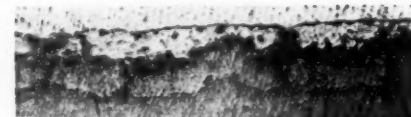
Same sheet as Fig. 11 after right angle bend with $\frac{1}{4}$ in. radius fillet. Cracking, but no flaking.
